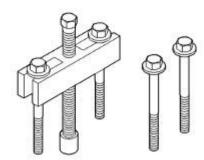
Camshaft Seal Installer MD-998306 Courtesy of CHRYSLER LLC
